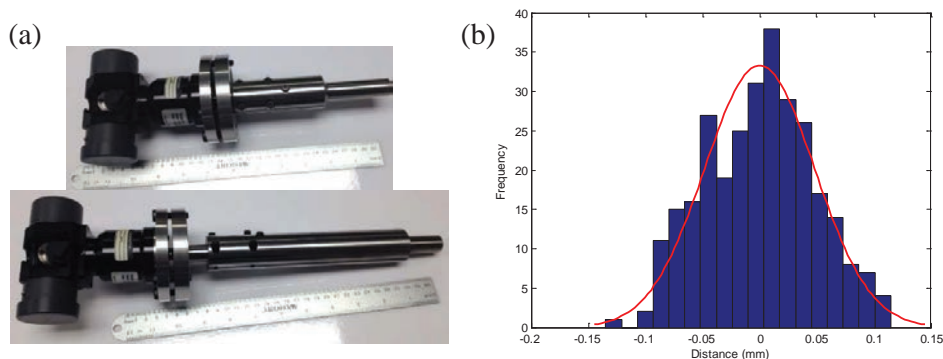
(a). Active Target machine tool spindle mounts; (b) Distance between short tool and long tool measurements.
